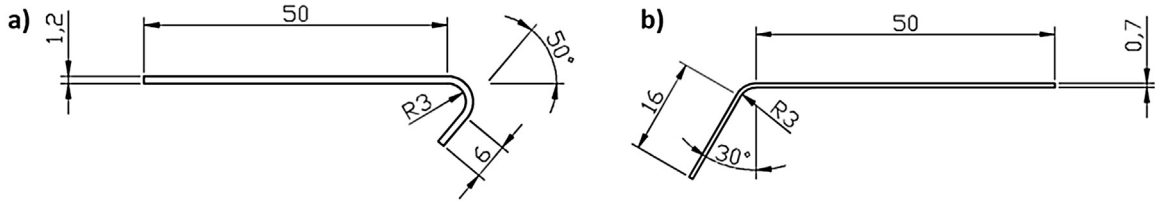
Dimensions of the aluminium (a) and steel (b) parts.
